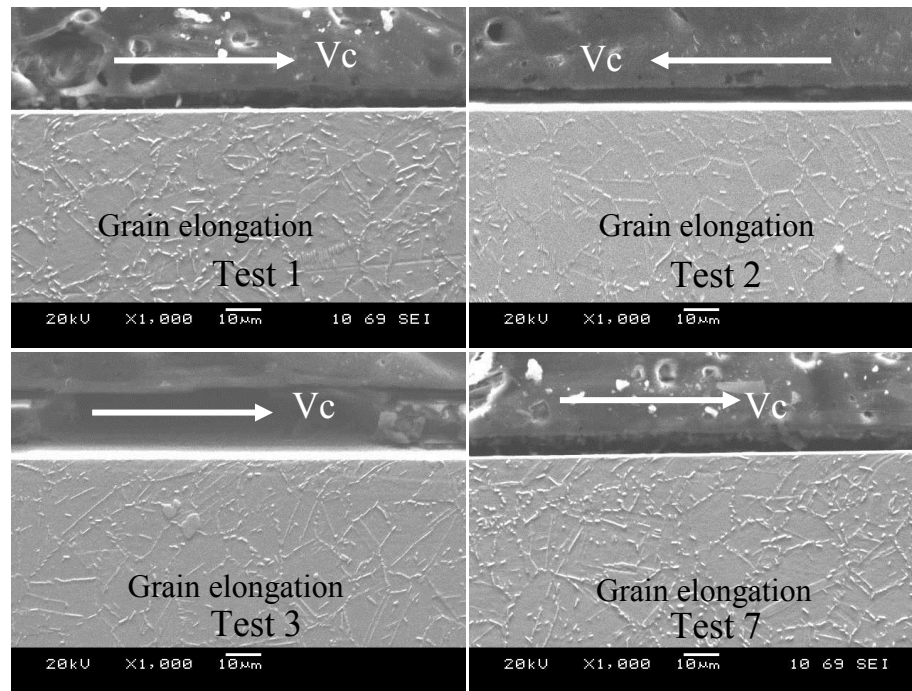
Cross sectional SEM images of workpiece sub-surface of Tests 1, 2, 3 and 7 produced with worn tools in a direction perpendicular to feed
